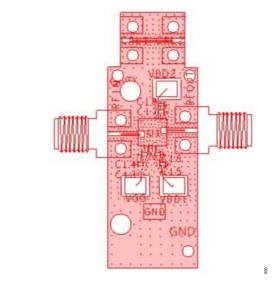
ADL8106-EVALZ Assembly Drawing (CAL1 and CAL2 Not Installed)
